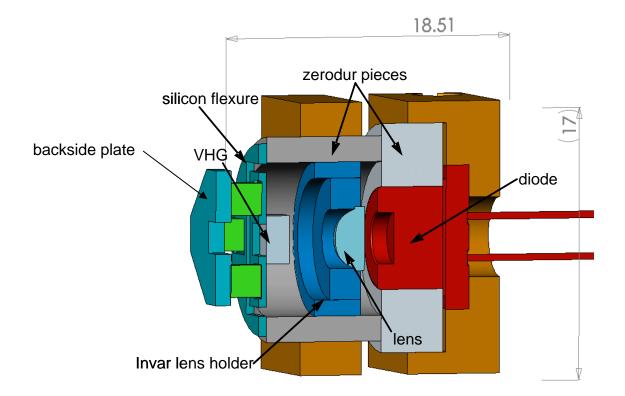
Schematic drawing of the generation 2 VHG laser system design. Dimensions in mm.
